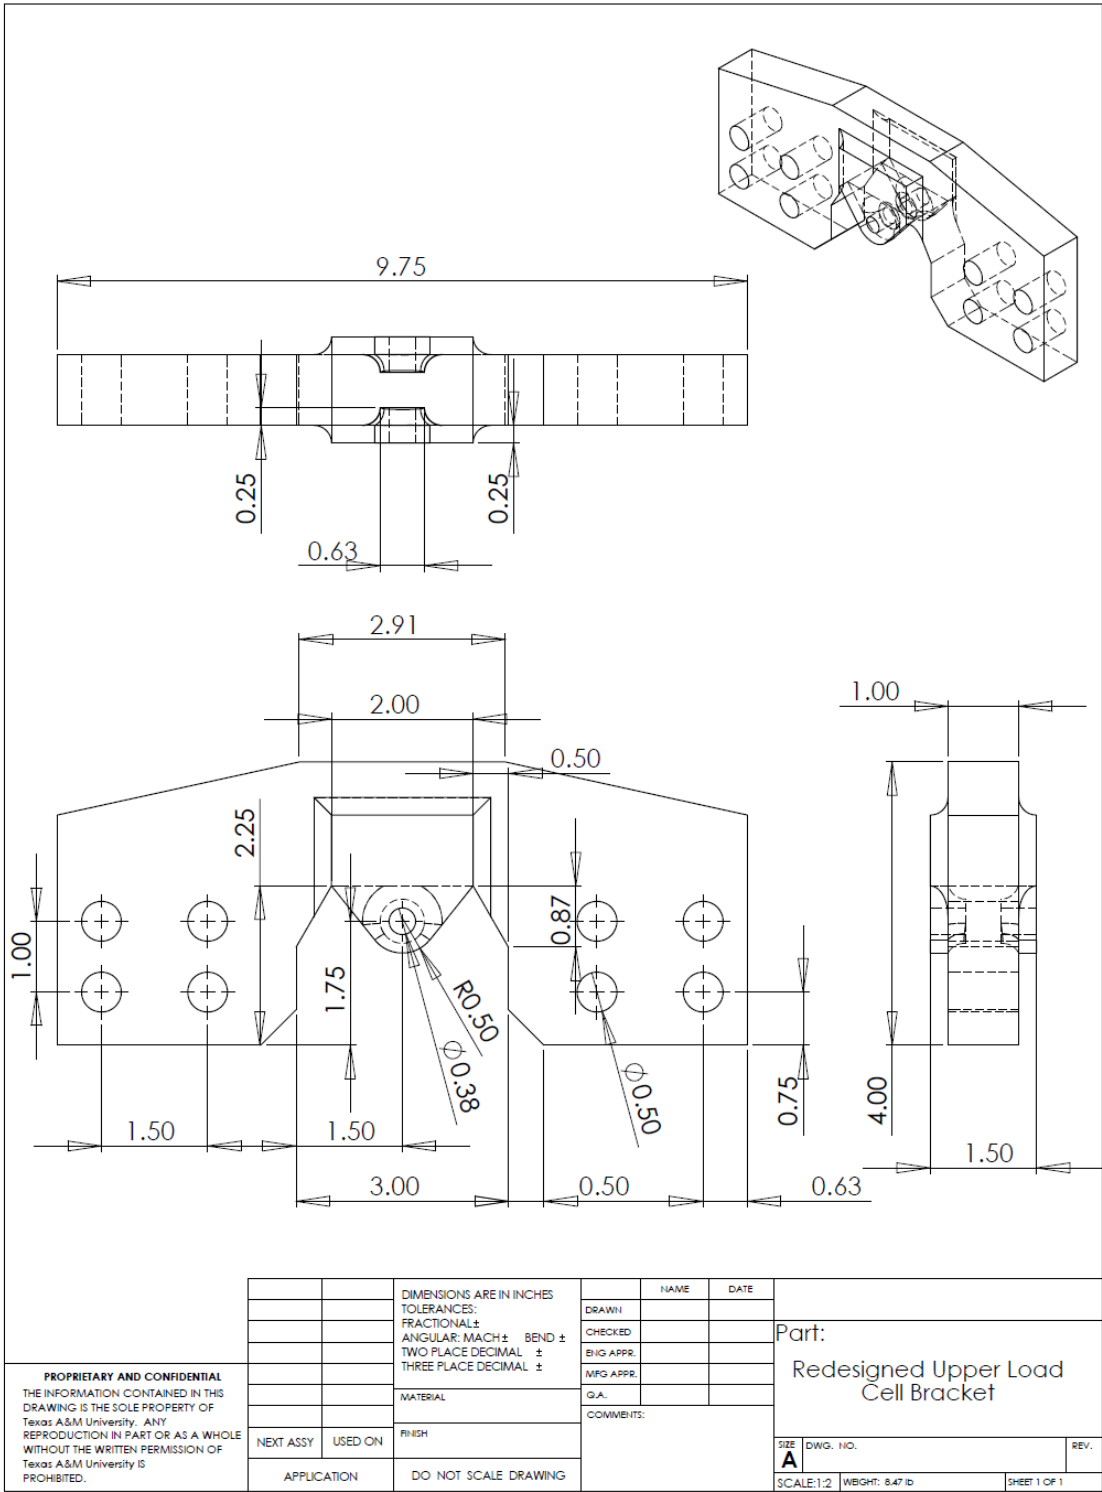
Dimensioned redesign upper load cell bracket (dimensions are in inches)
